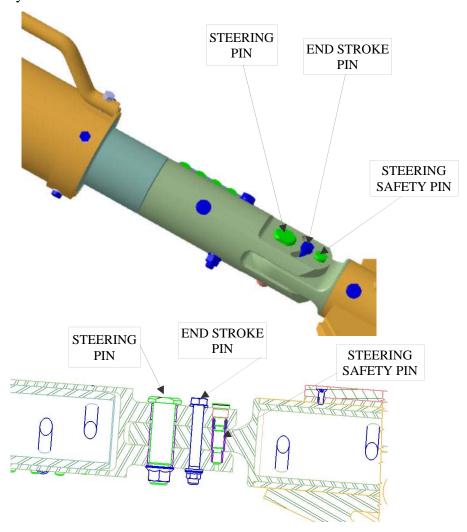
Tow Bar Assy longitudinal section: steering safety pins detail
